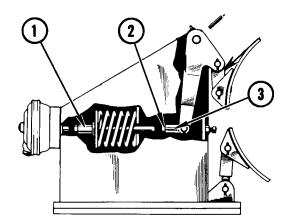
BRAKE ADJUSTMENT 1. Push Rod 2. Locknut 3. Yoke
